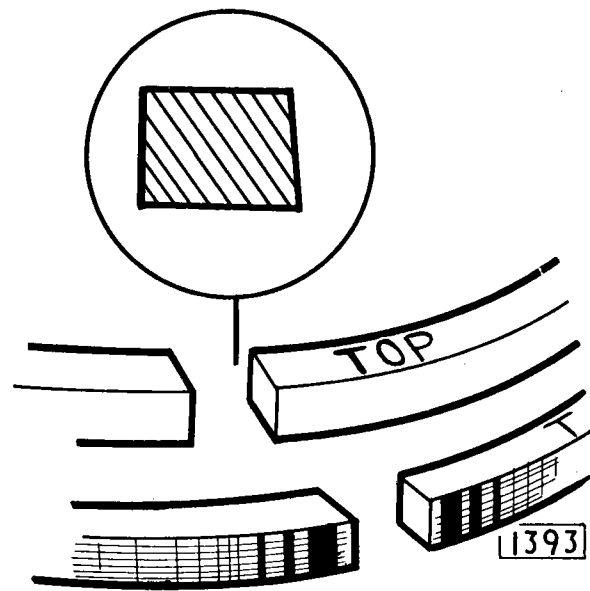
Showing the identification marks on tapered periphery compression rings
